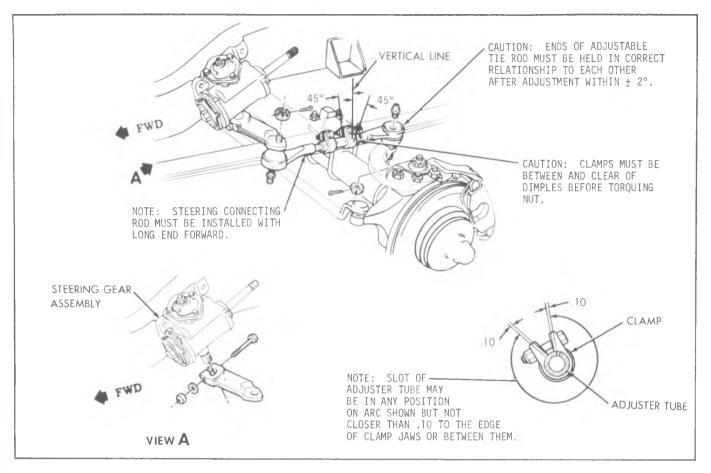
B-109-Adjustable Connecting Rod Assembly-K Series
